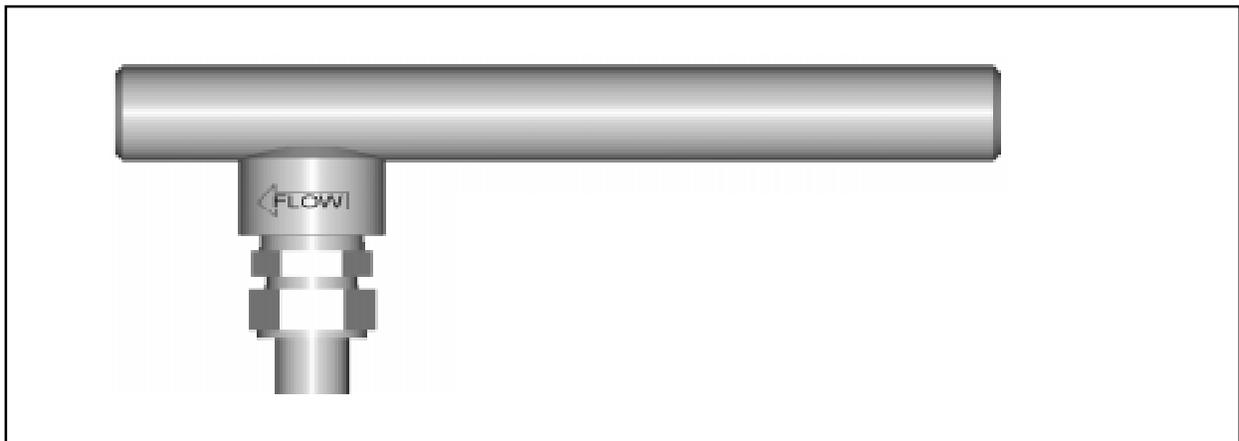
Model ST98 In-Line Butt Weld Mount
